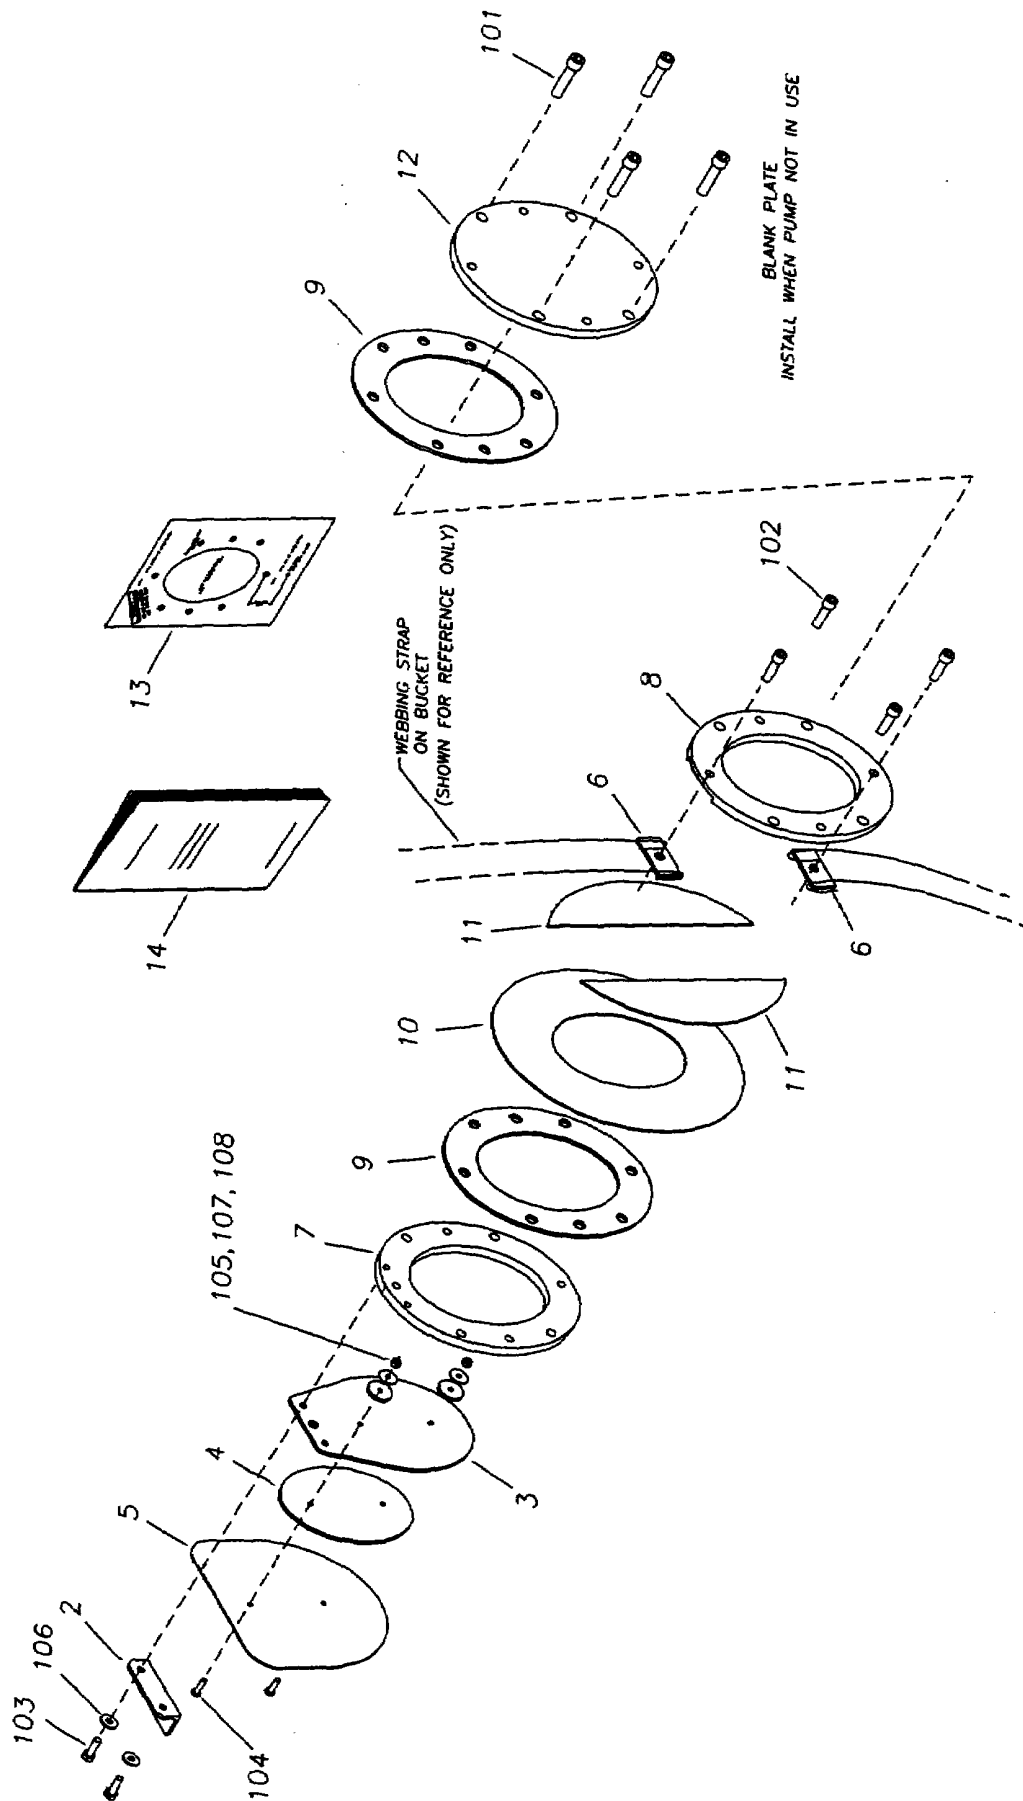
POWER FILL II PUMP ASSEMBLY
